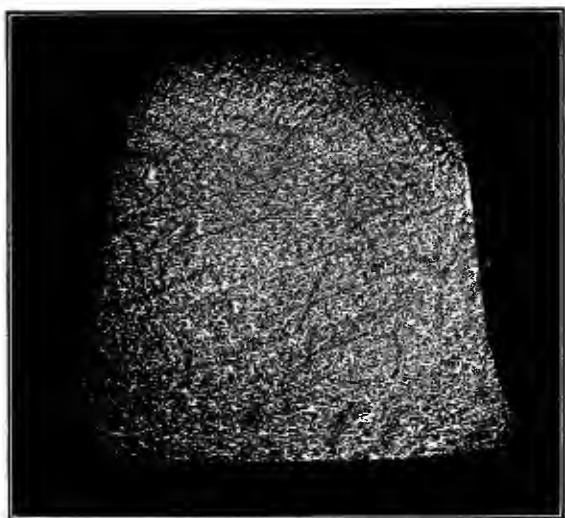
Face of tooth of high-speed cutter $\times 5$.
